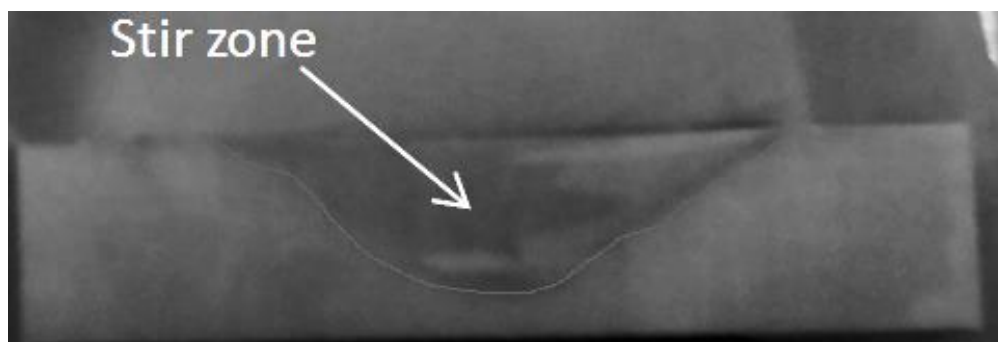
Optical macrographs: cross section of the FSP specimen showing the stir zone shape of samples friction stir processed at: 1400 rpm, and 26 mm/min
